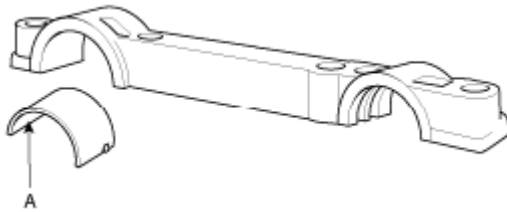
Identifying Exhaust Camshaft Upper Bearing
